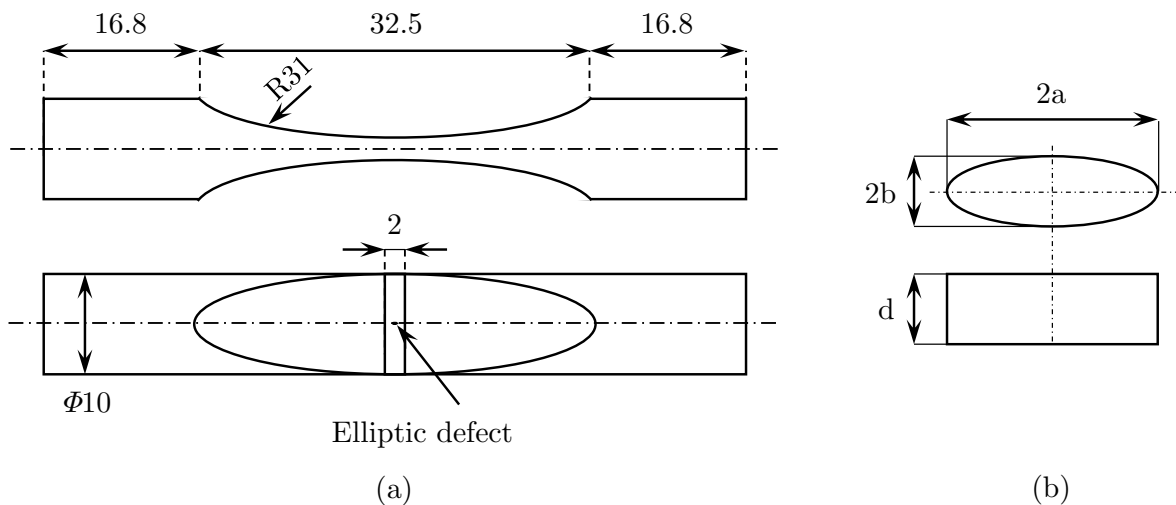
(a) Geometry of the specimen used for load-controlled fatigue tests. (b) Geometry of the elliptical notch in the center of the specimen (dimensions in mm).
